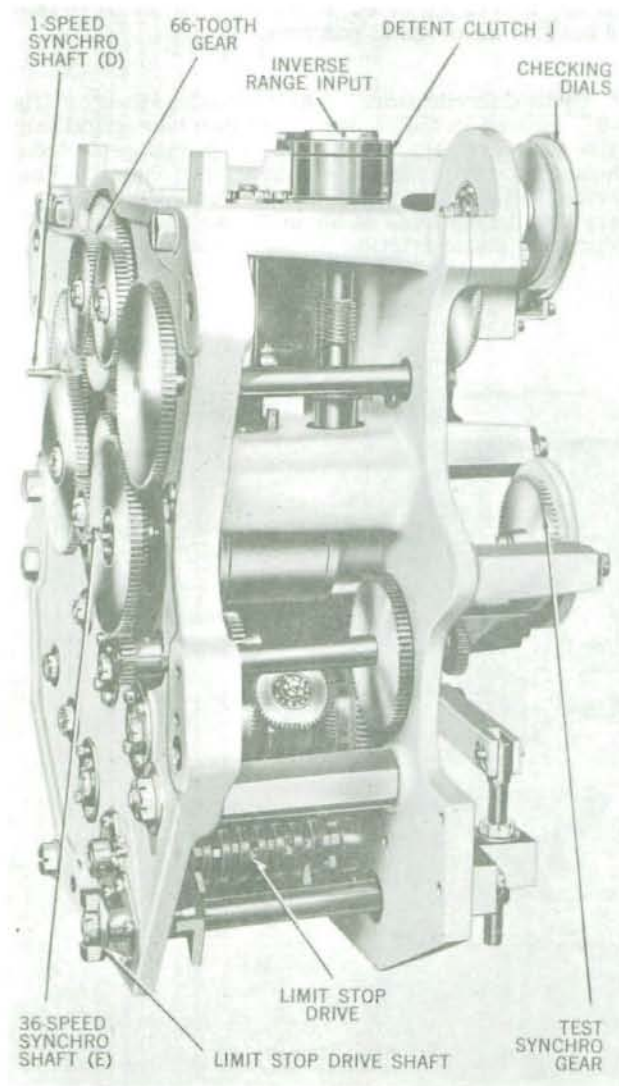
Train Receiver-Regulator Mk 18 Mod 5 Gear Box Assembly, Side View
